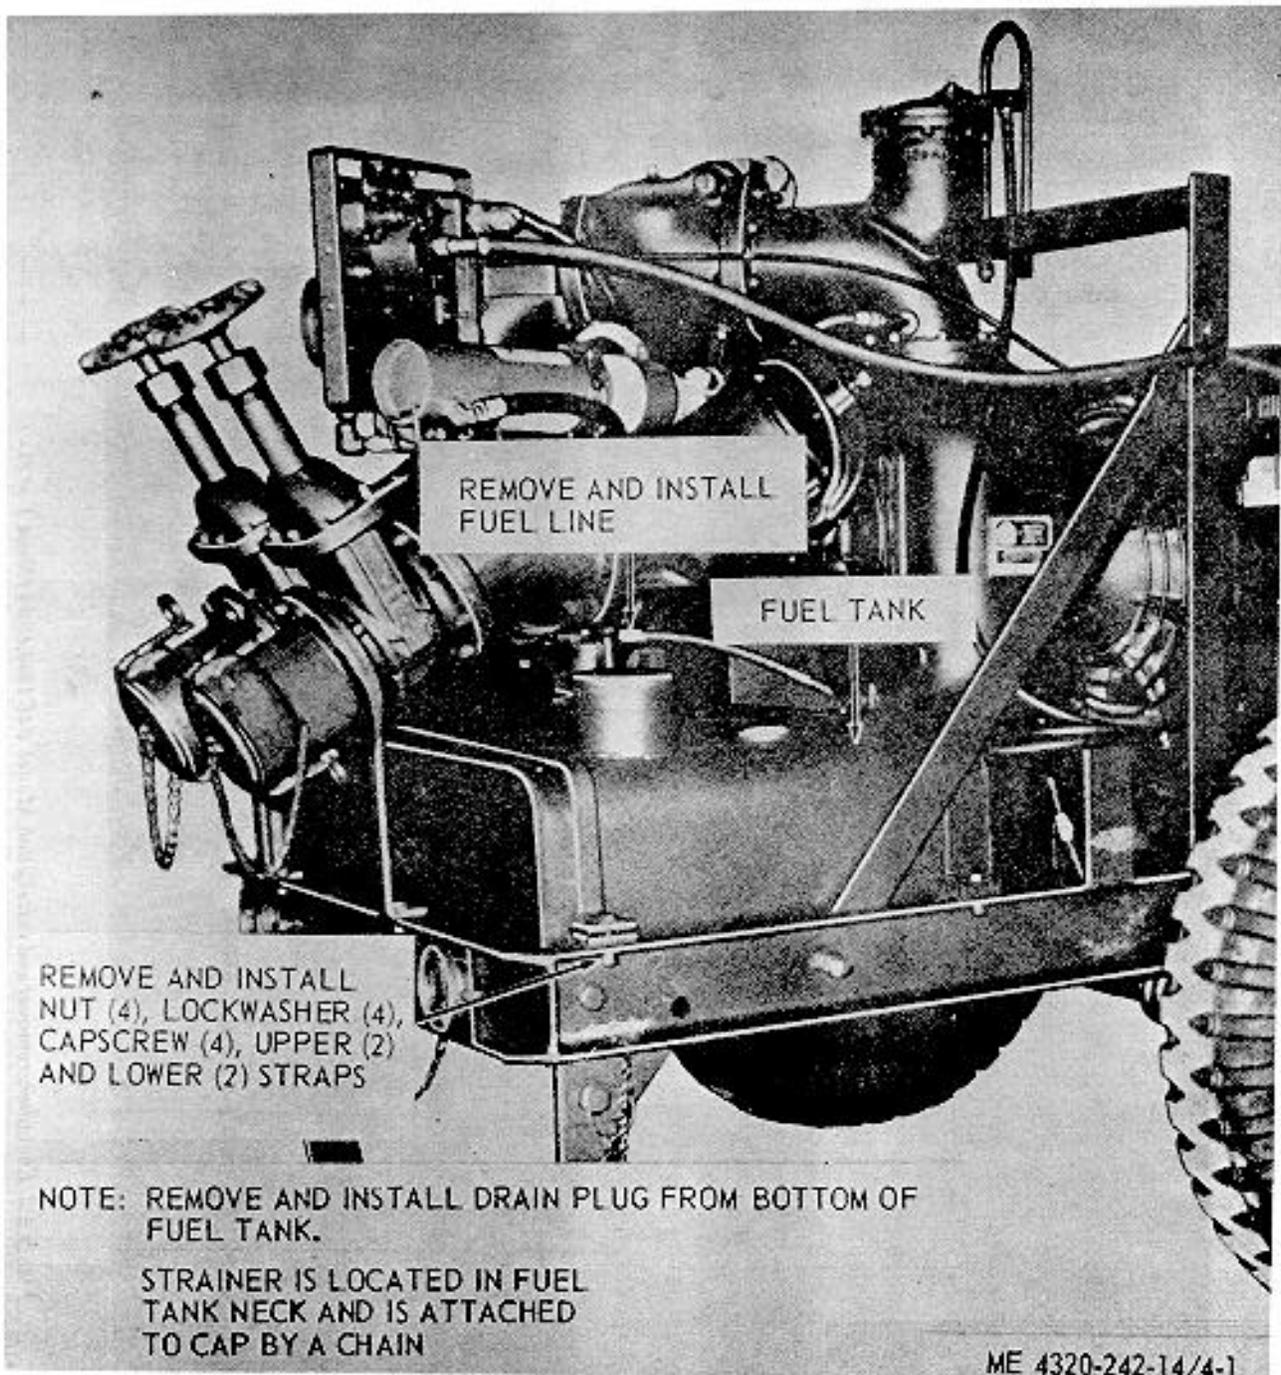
Fuel tank and fuel lines, removal and installation.
